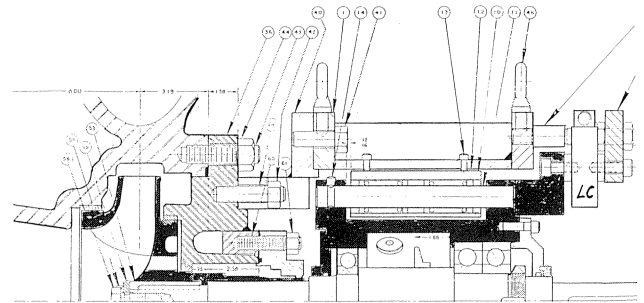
Design Drawing of Centrifugal Pump Axial Thrust Test Rig.
